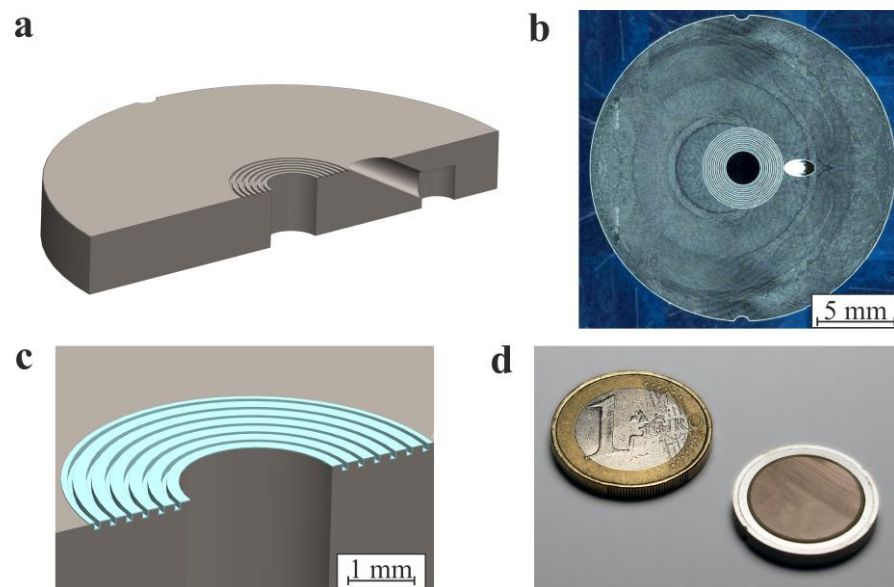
(a) Model of the NO valve body incorporating two fluid ports and micromachined trenches. (b) Light microscope picture of the micromachined valve steel body. (c) Model of the valve seat coated with Parylene-C. (d) Photograph of an assembled microvalve after laser welding and piezoelectric actuator bonding next to a Euro coin. The microvalve has a diameter of 20 mm and a height of 2.6 mm.
